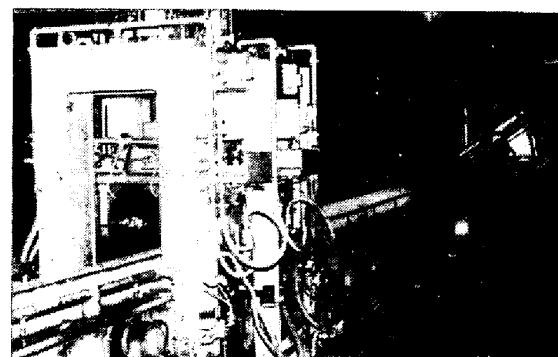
Horizontal continuous casting machine of Sumitomo⁷⁾.
